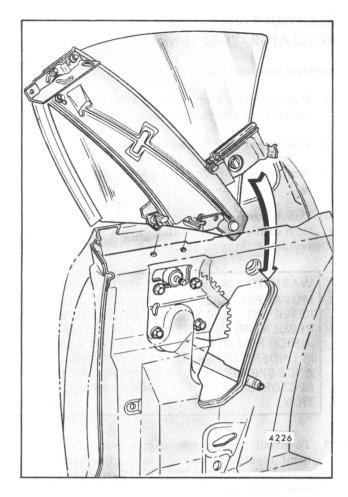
Quarter Glass and Guide Assembly - "E-67" Style
